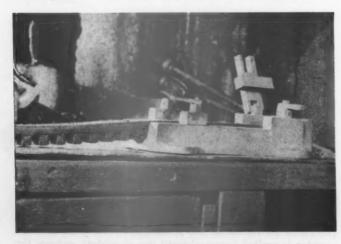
Miner coupler lock yoke with coupler in place ready for application of the draft gear
